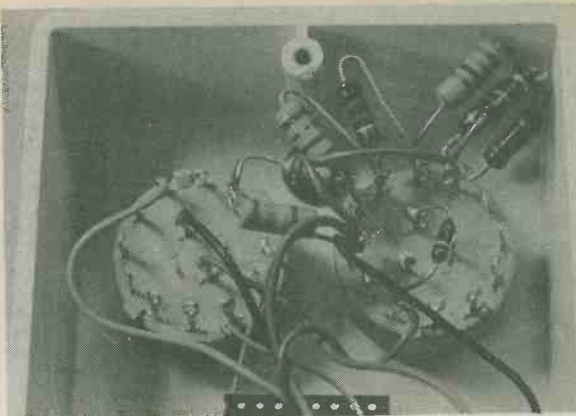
Wiring details for the voltmeter, including the Verobard panel assembly
